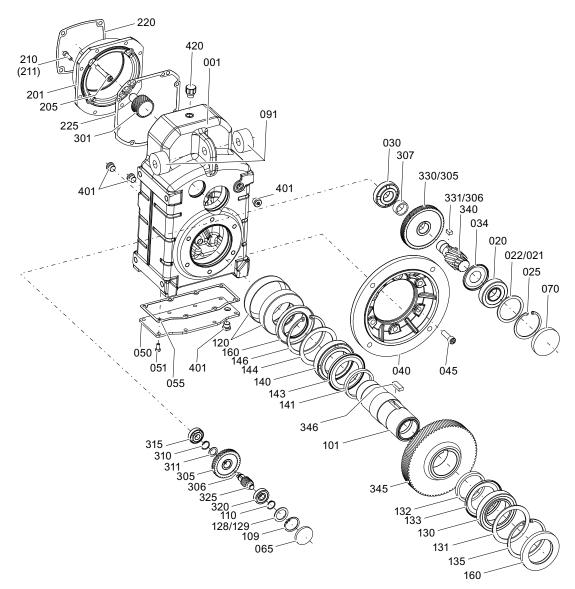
Parallel shaft gearbox sizes 38B - 188B
